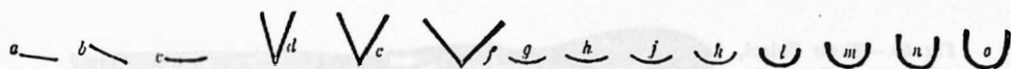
Cutting Edges and Sections of Carving Tools.
